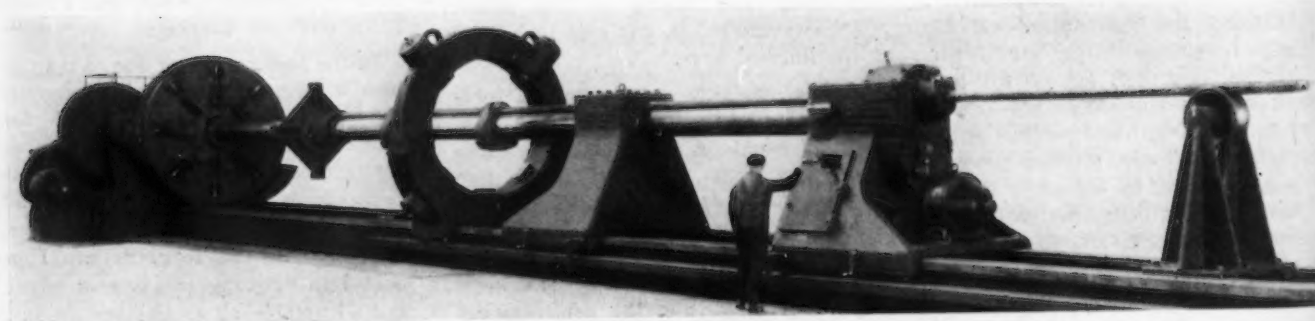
Hollow forgings for hoops and jackets are rough bored on this special boring machine. ▲ ▲ ▲
